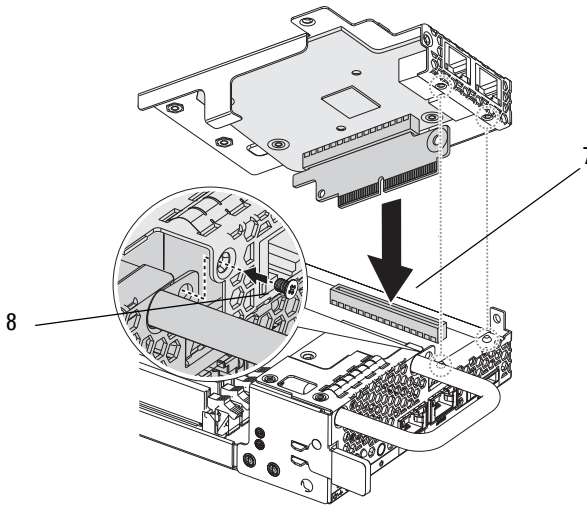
Installing a Mezzanine Assembly in a Sled
